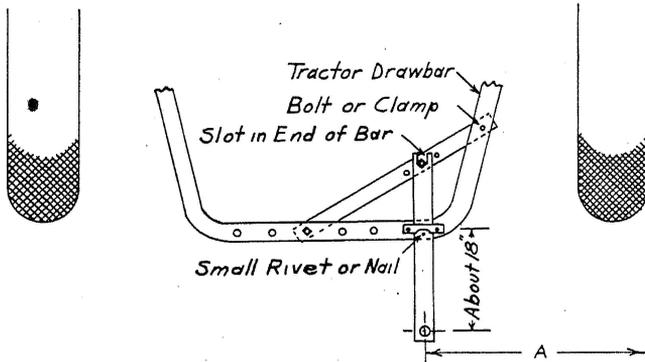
Drawbar extension for tractors with stationary drawbars. Distance "A" should be just sufficient to allow the mower to cut a full swath with the tractor wheel running next to the uncut grass.
